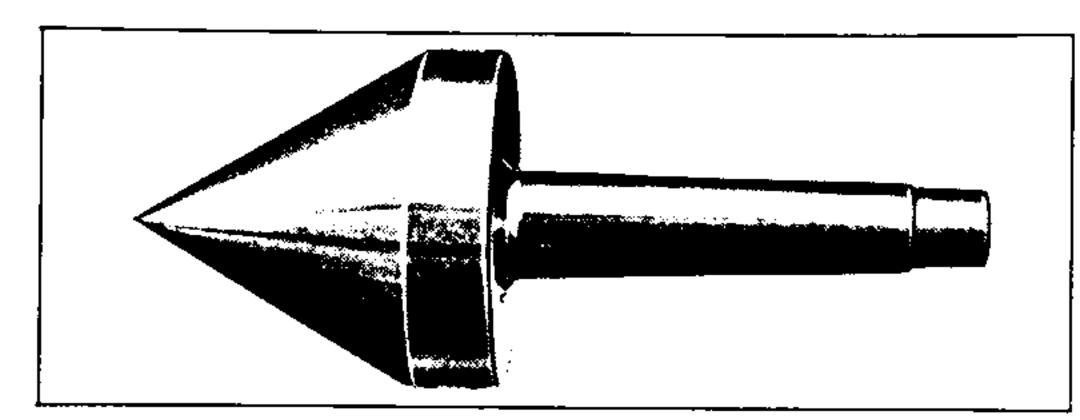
Large Male Center—head is hard, $1\frac{1}{2}$ diameter with 60° included angle. Useful for turning tubing or work with holes too large to run on standard centers
